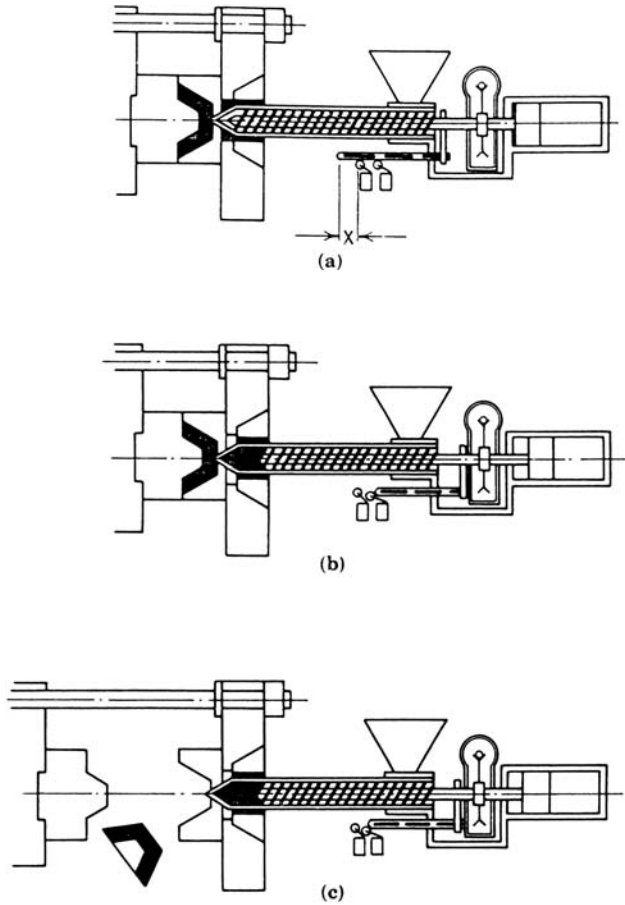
Schematic illustration of injection molding. (a) The mold is closed. Polymer resin fills the hopper and is transported to the mold and liquified by a heated screw drive. (b) The mold is filled with molten plastic. (c) After the plastic solidifies, the mold is opened and the molded part ejected. (Reproduced by permission from N. M. Bikales, Ed. 1971. *Molding of Plastics*. John Wiley & Sons.)
